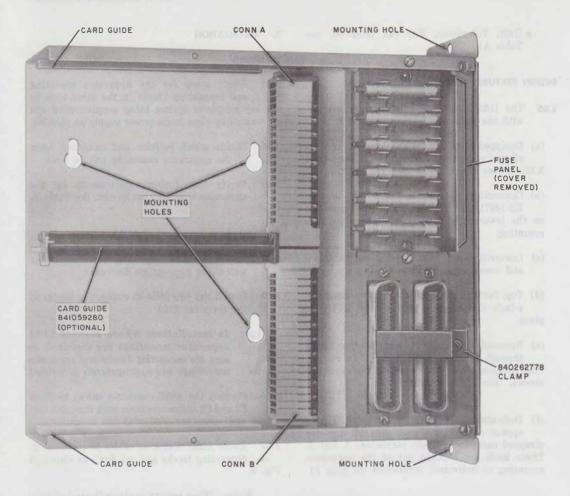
110A Apparatus Mounting (With Card Guide, Cover Removed)
